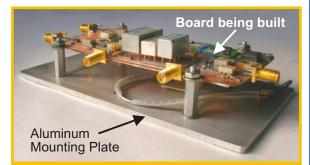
An assembly jig for holding the board being built can be made from an aluminum plate or piece of wood. It gives the board some weight and stability during construction and testing.
